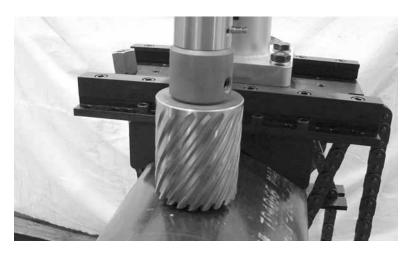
Lower the hole saw close to the cutting position on the pipe.
